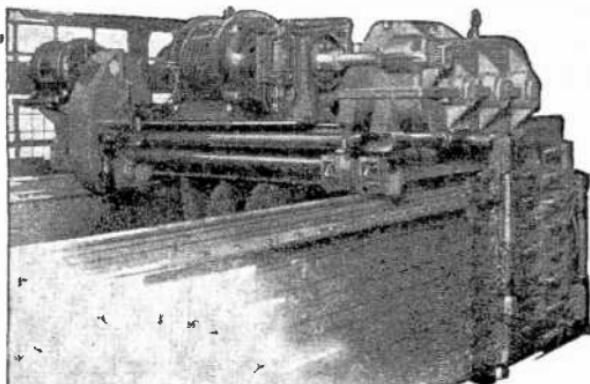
,876.—*Euclid crane construction 3. Heavy duty mill type trolley. The two side housings are iron castings. The separator girt is made up of structural steel and steel castings.
